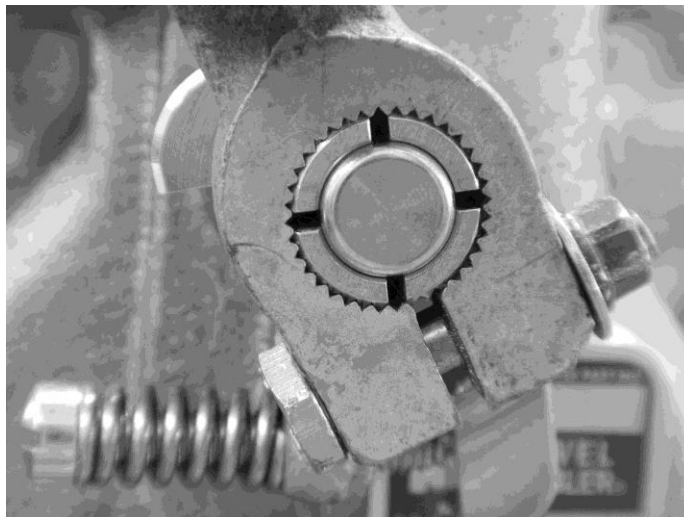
Proper installation of Throttle Arm to the Serrated Shaft
